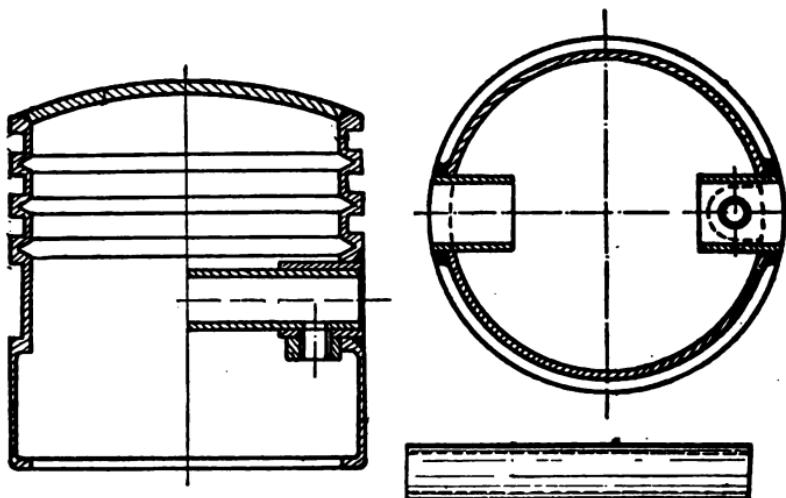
Sections of a piston built up from a tubular casting, showing method of assembling the elements by autogenous welding; also hollow tubular piston pin.
